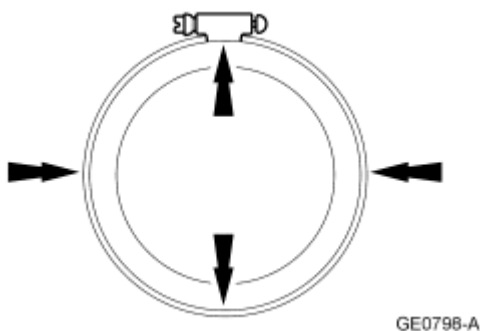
Marking Rear Driveshaft Into Four Equal Sections
